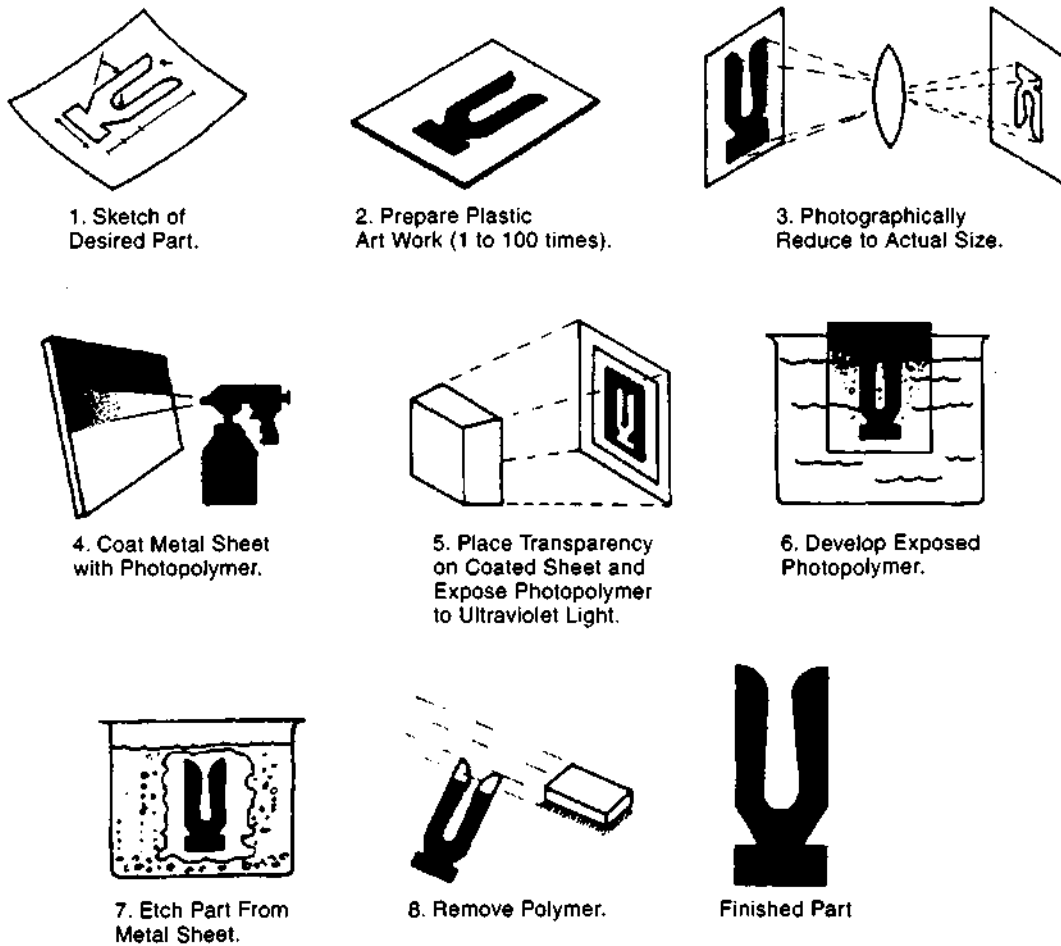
Major steps of photochemical blanking. (Courtesy Mechanical Engineering.)
